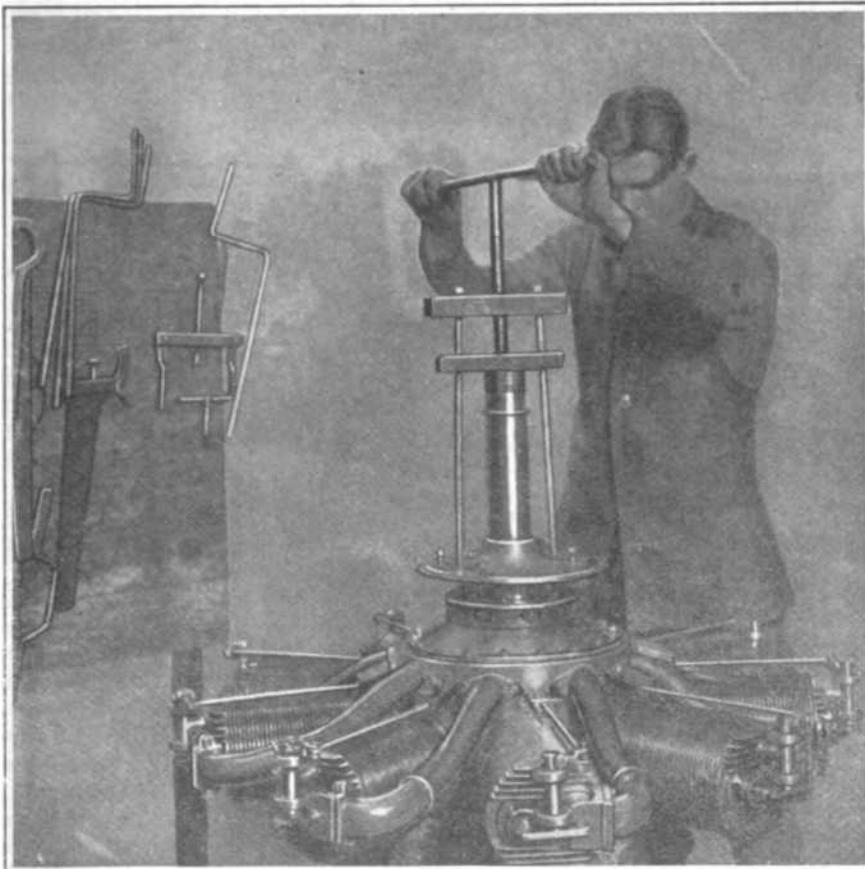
American soldier-mechanic overhauling Le Rhone rotary motor. Special puller shown was developed for removing engine supporting plates
